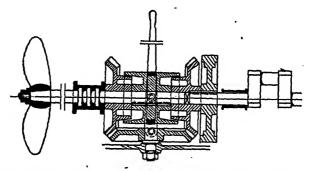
Friction Clutch and Bevol Wheel Gear for Reversing Direction of Rotation of Propeller.
